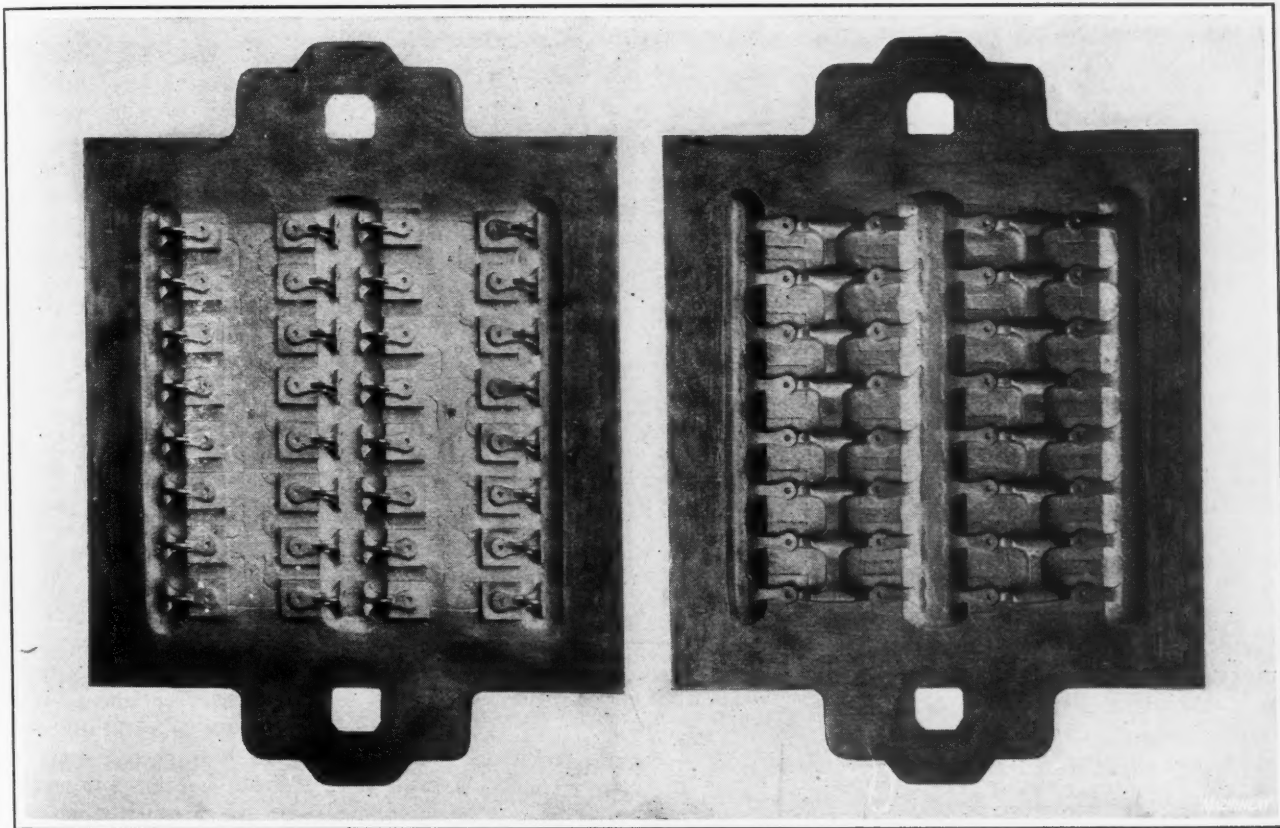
Double-faced Match Plate Pattern which provides for casting Thirty-two Pieces at a Time
